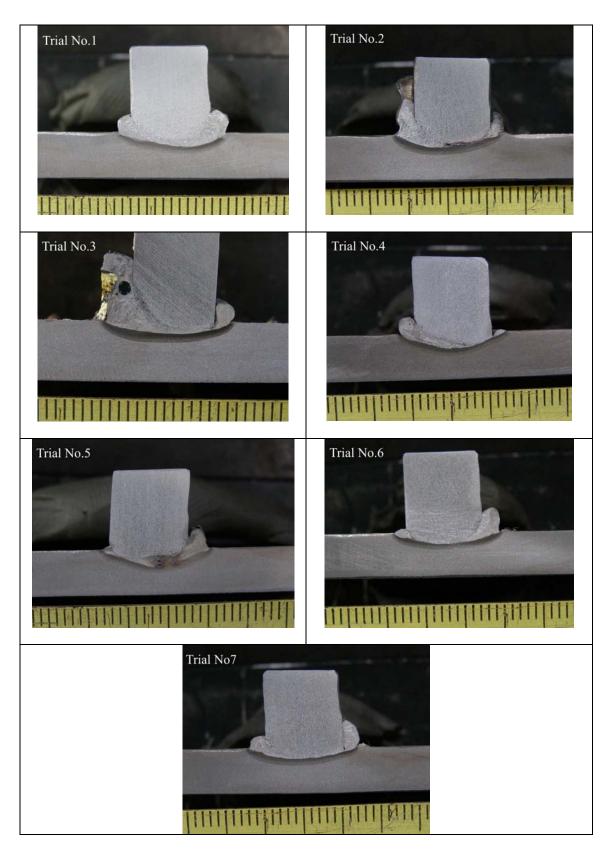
Macro sections of welded joints (welding parameters according to table 1)
